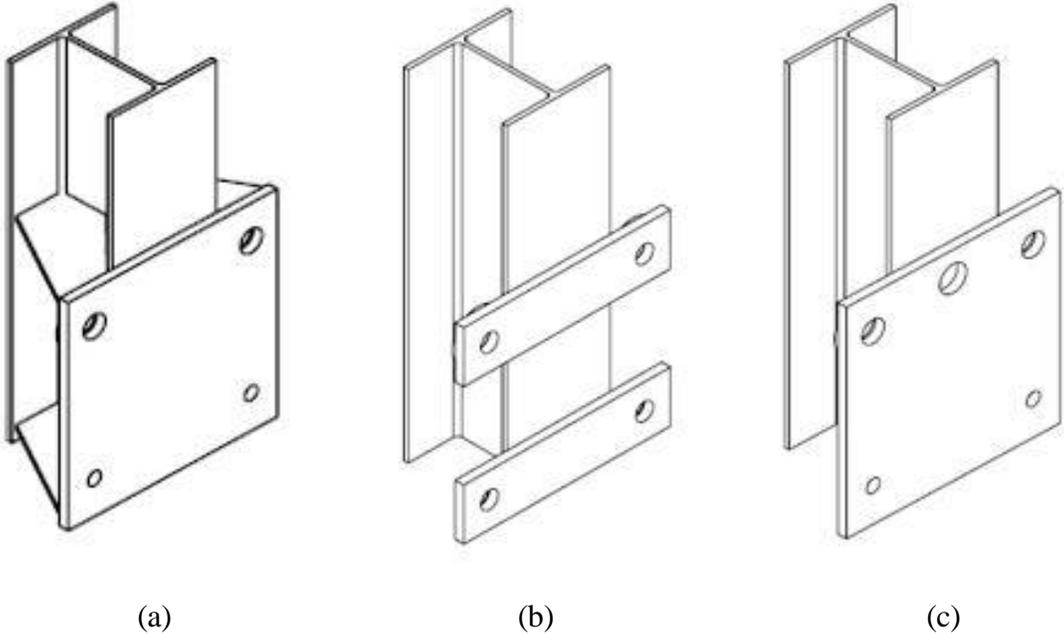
Welded Plate and Spacer Block Post Assembly Concepts: (a) Plate Attachment with Gussets, (b) Two Mounting Plates, and (c) Singular Plate Attachment
